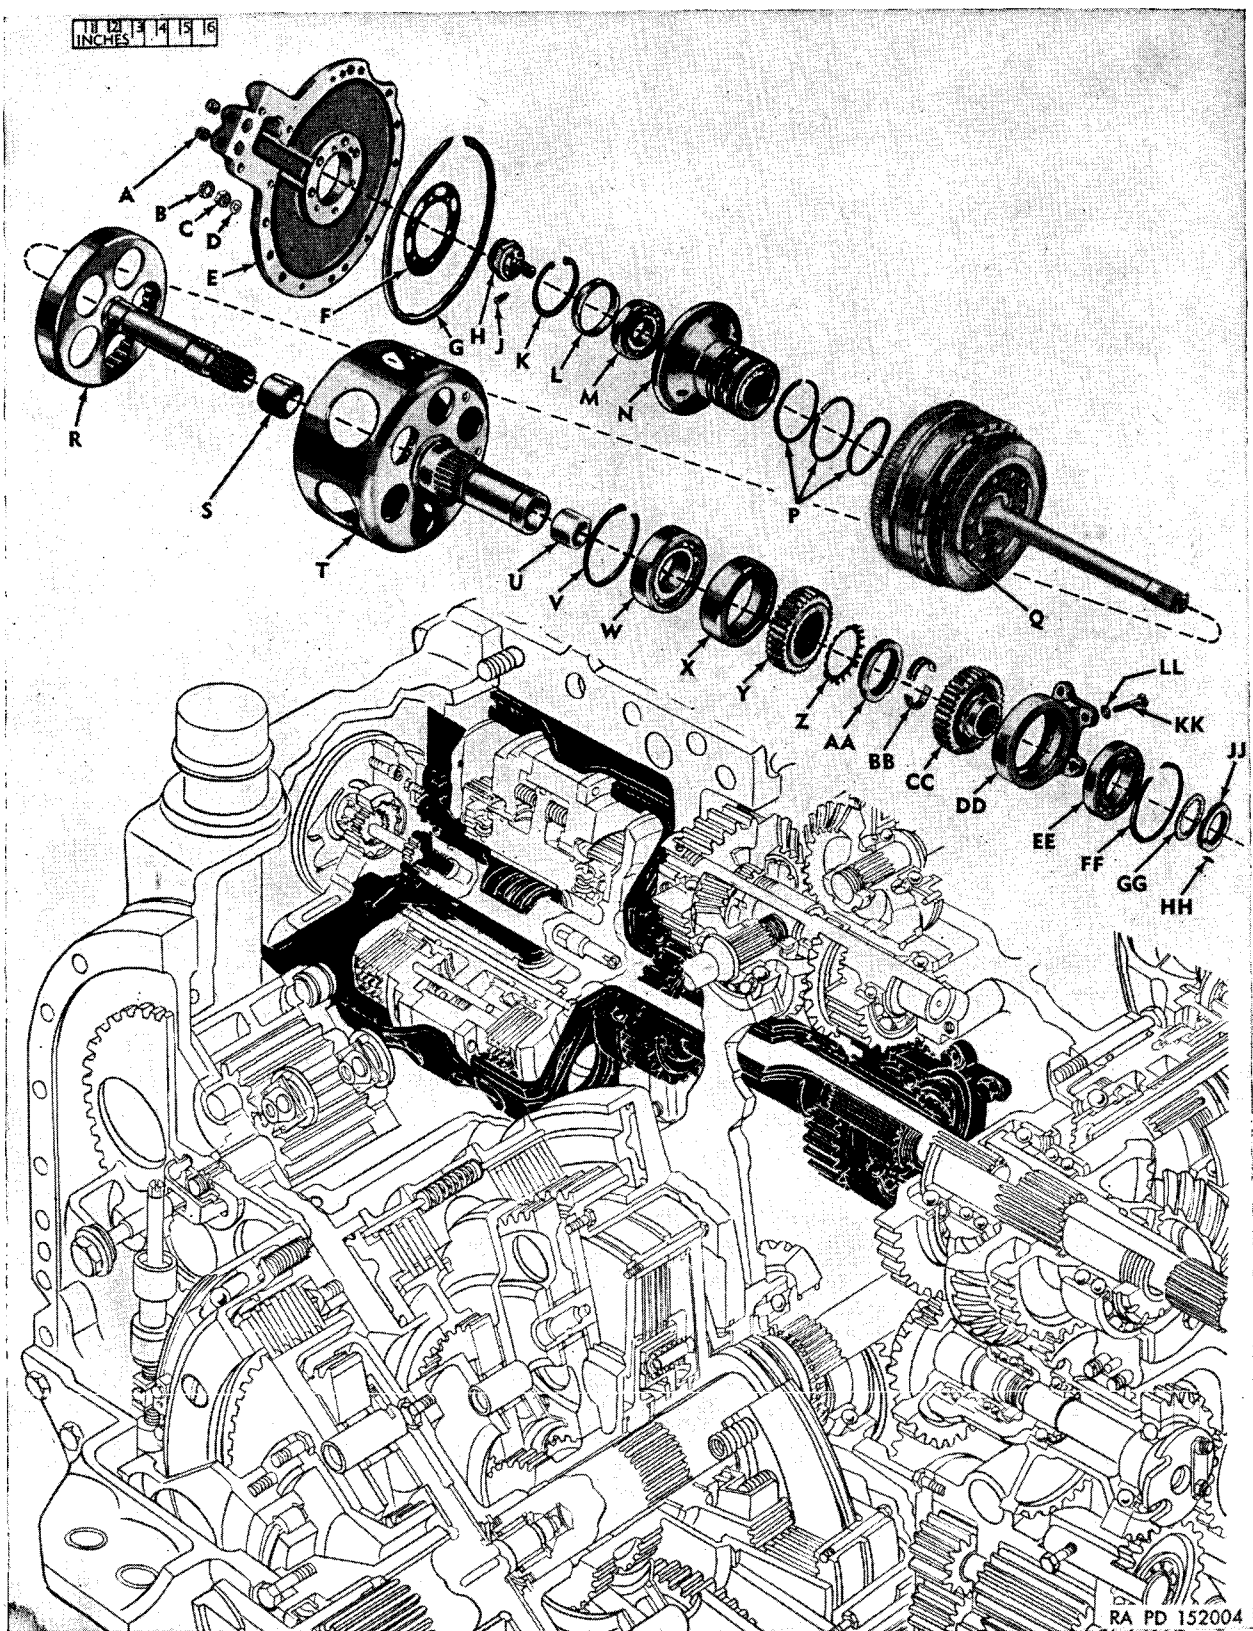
Left and right steering shafts, oil transfer sleeve, and rear cover plate assemblies—exploded view.
